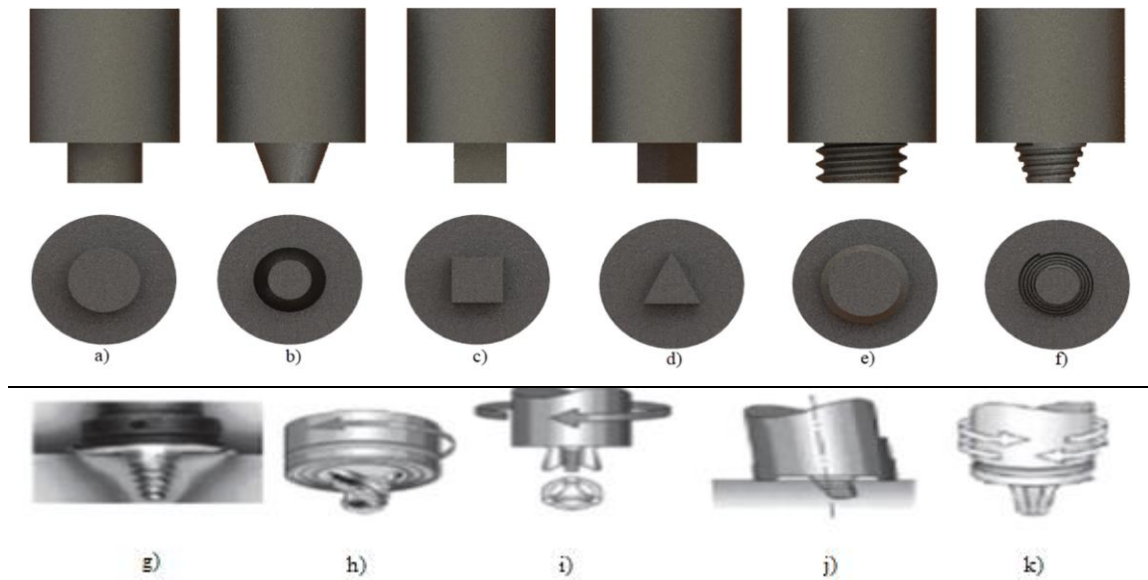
(A) Straight Cylindrical Pin, (B) Tapered Conical Profile, (C) Square-Shaped Pin, (D) Triangular Profile Tool, (E) Threaded (Helical) Pin Design, (F) Tapered Threaded (Conical Helix) Pin, (G) Spiral or Swirling Pin Structure, (H) Multi-Fluted (MX-Type) Triflute Tool, (I) Expanded-End Triflute Pin, (J) Angled or Skewed Pin Configuration, (K) Post-Stir (Re-Stirring) Tool Design [53]
